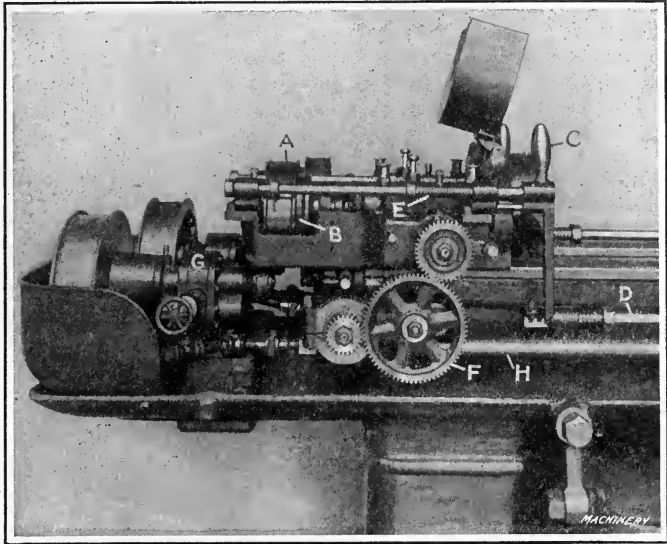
Close View of Driving Mechanism with Gear Guard removed
